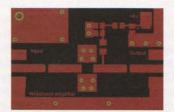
PCB mask for the wideband amplifier shown full size (40mm x 26mm).
